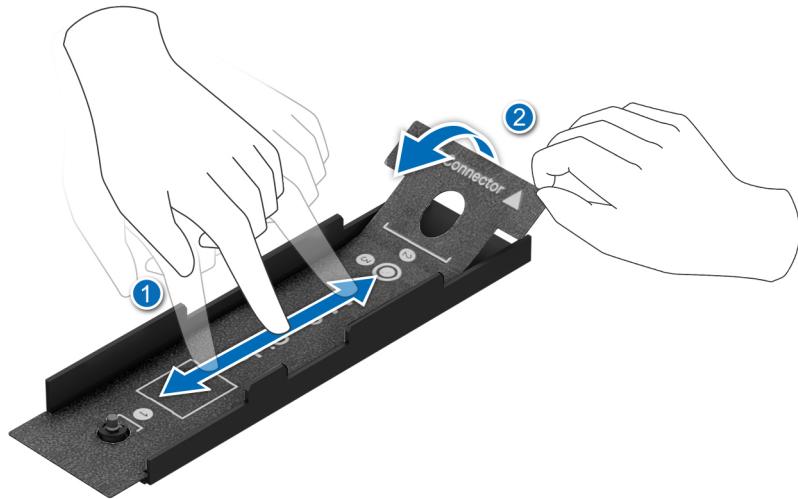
Pasting the new thermal pad inside the top cover and removing the black mylar
